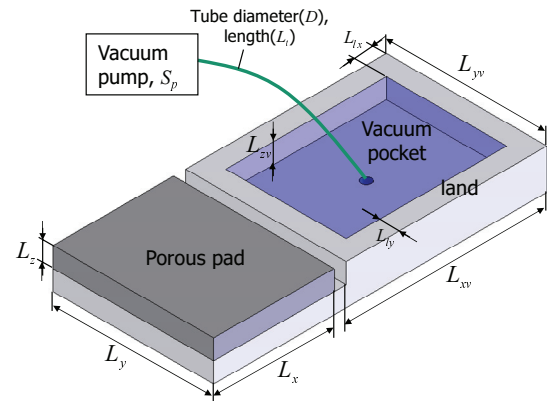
Vacuum preloaded air bearing for pressure analysis
